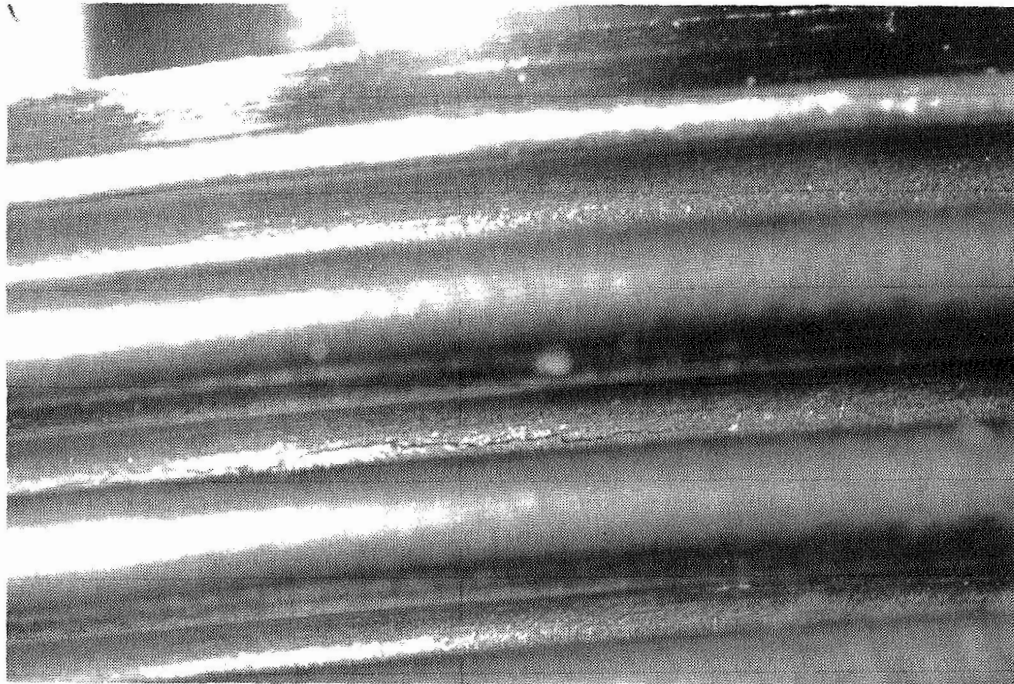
1 Valve Poppet-Shaft Bellows Fatigue Crack
